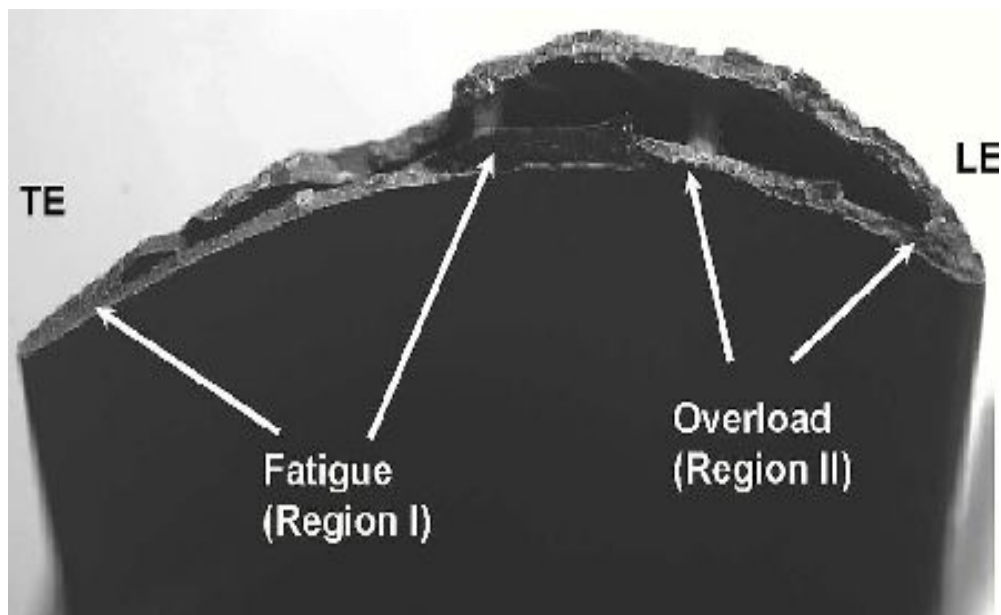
11: Fracture surface of a blade with fatigue failure on the convex side near trailing edge (TE: trailing edge; LE: leading edge) [103].
